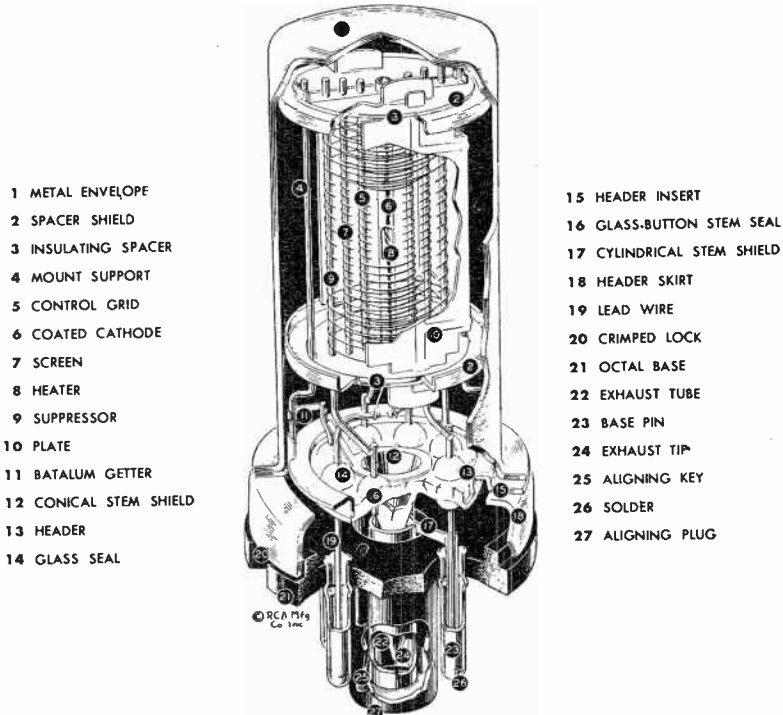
Details of construction of an "all metal" radio vacuum tube. (Courtesy of RCA Manufacturing Company, Inc.)
